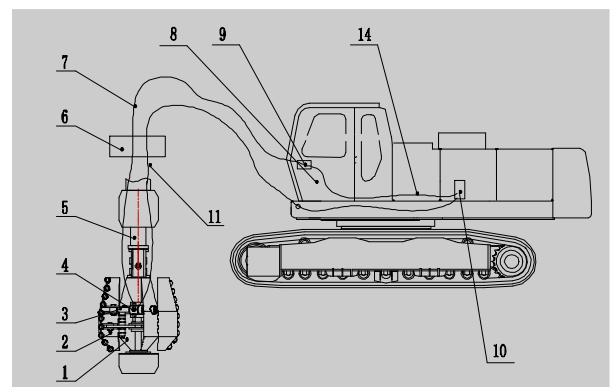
Location Plan of Rotary Reaming Device Components Installed in the Rotary Drilling Rig
